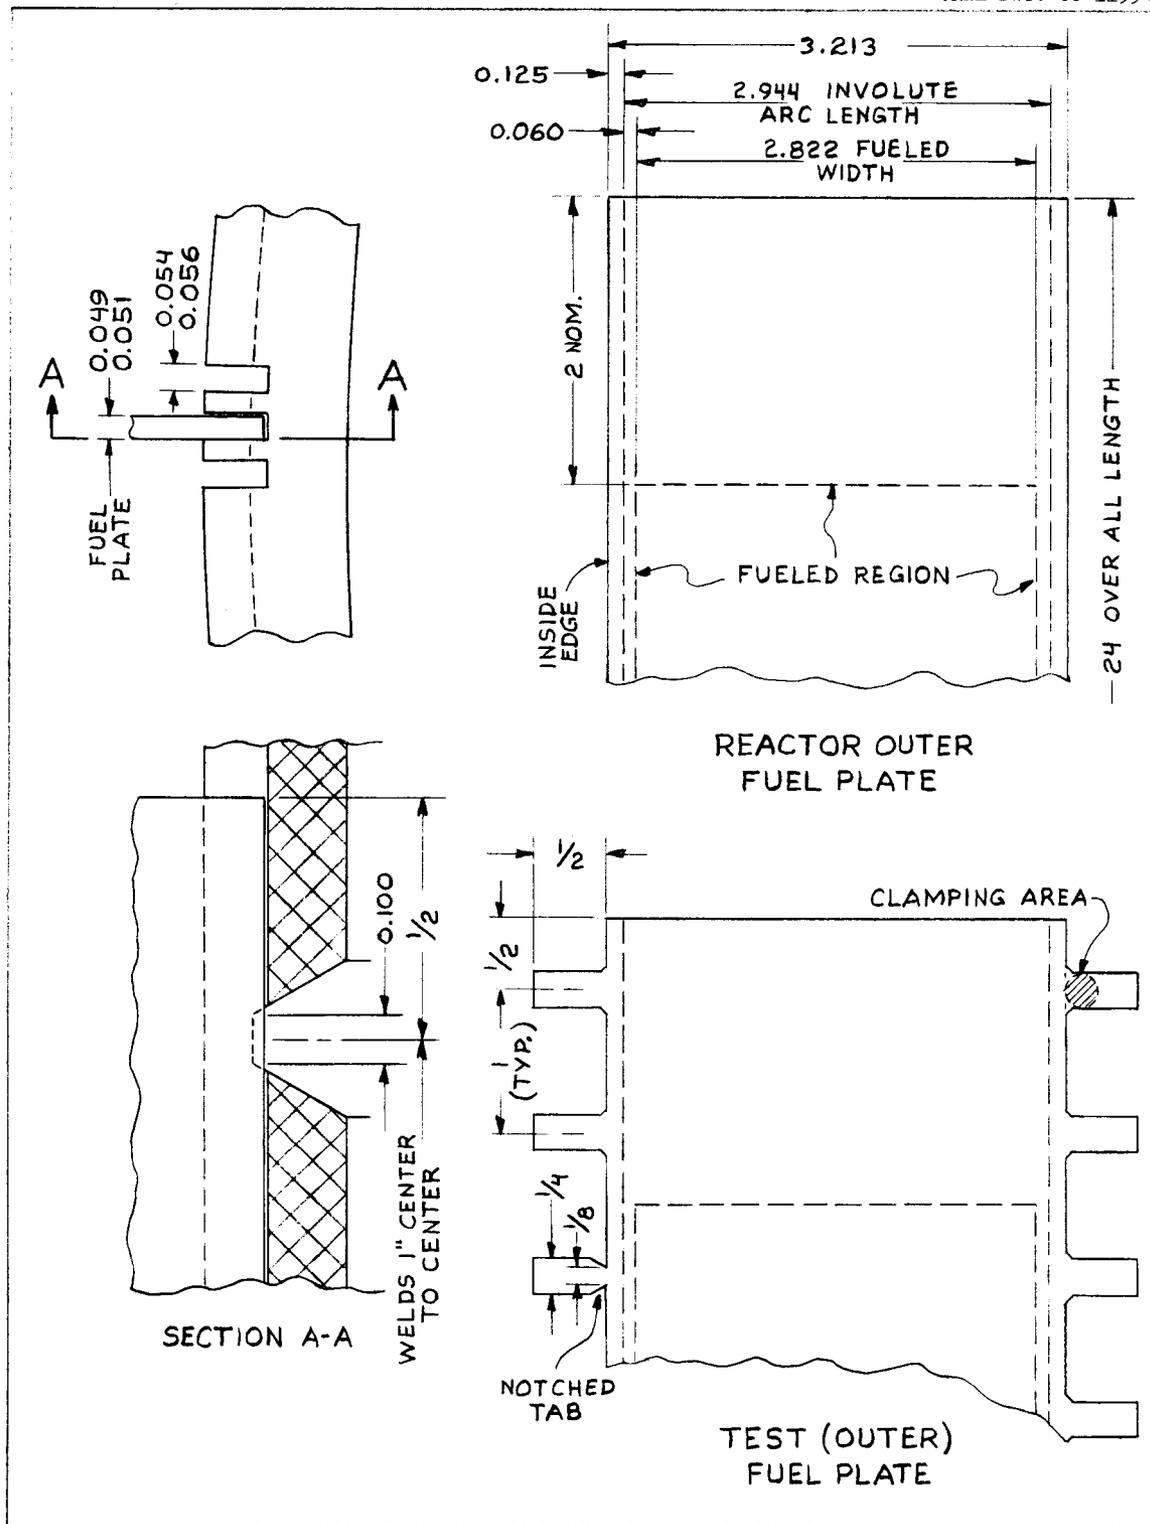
Fuel Plate Groove and Weld Groove Detail.
